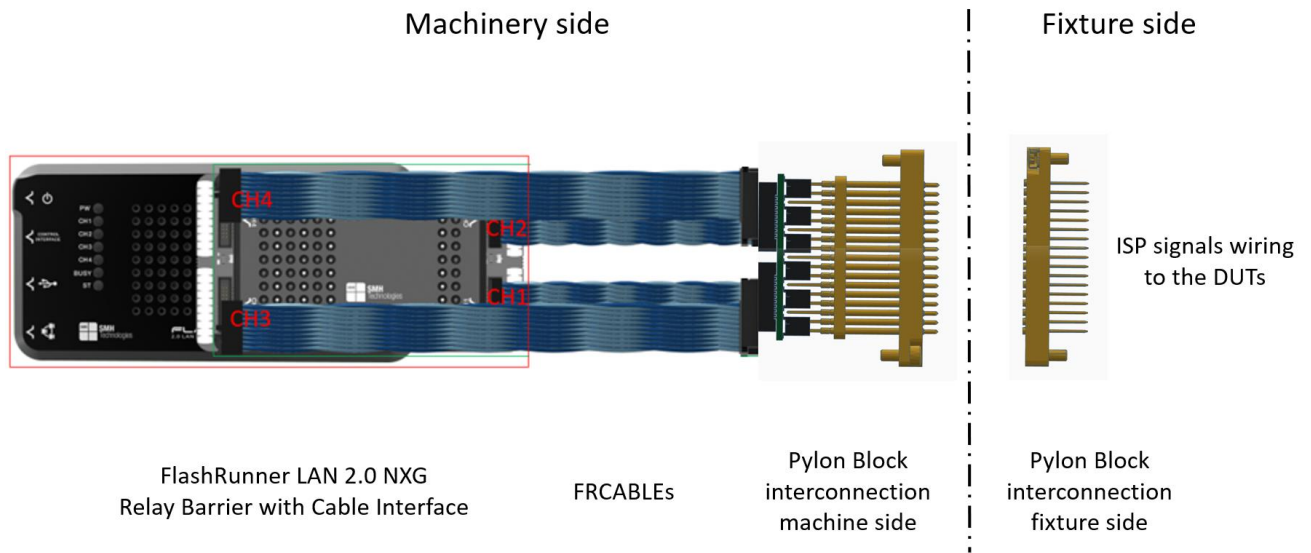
Pylon Block integration scheme of a FlashRunner LAN 2.0 NXG with Relay Barrier placed on the machinery side
